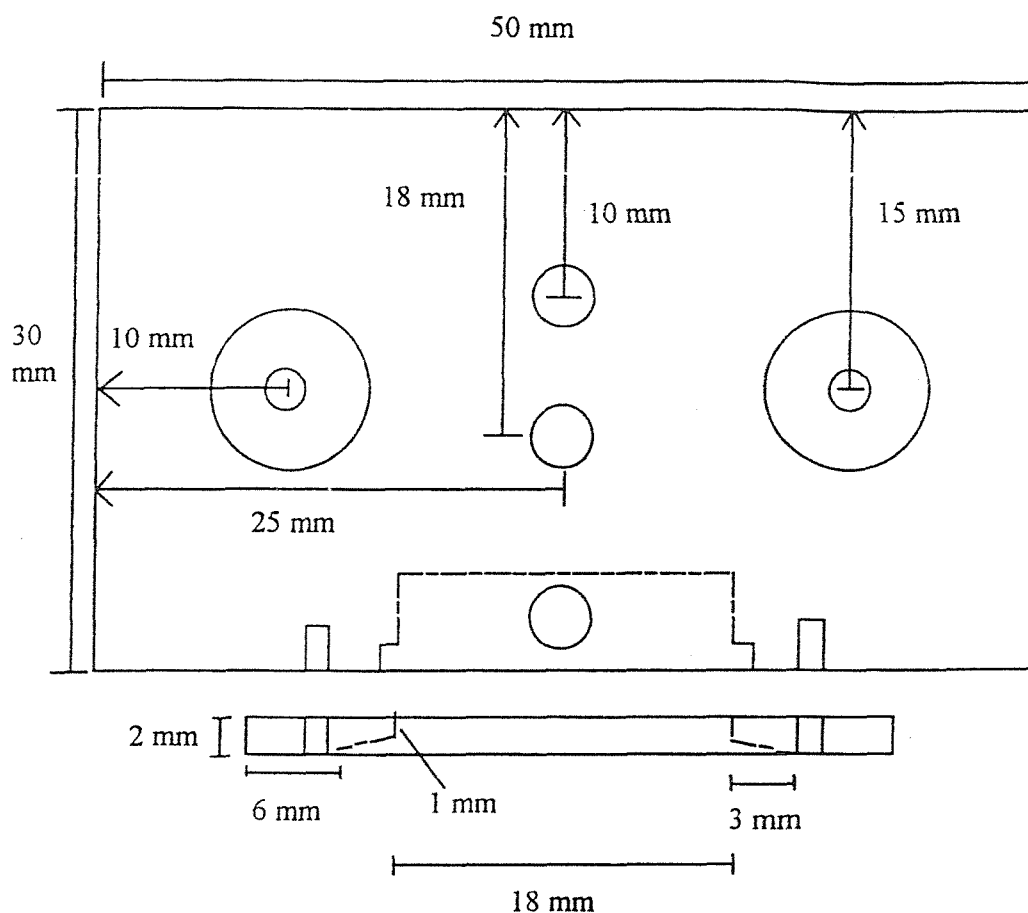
Plan View of the *in situ* EXAFS cell, showing cross sections through the sample area and clamping ring
